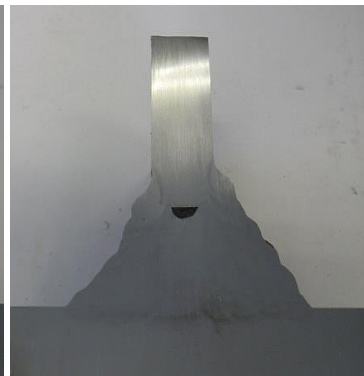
Weld face of mild steel with different gaps for 10 mm thickness
